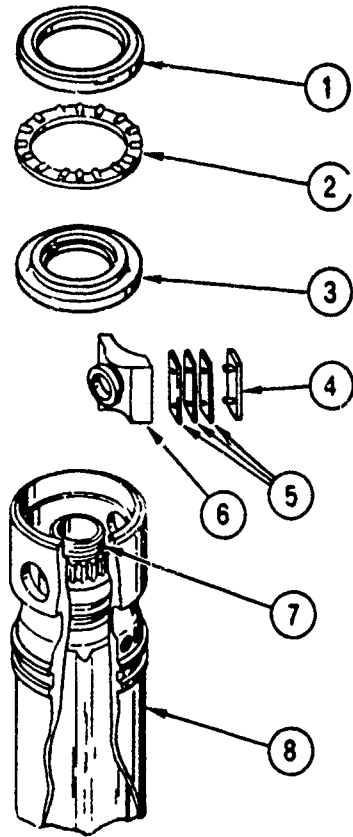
Removing Piston and Orifice Support Tube from Cylinder, Exploded View
